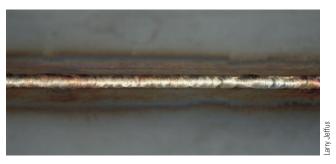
Outside corner joint. Note precleaning along weld.
